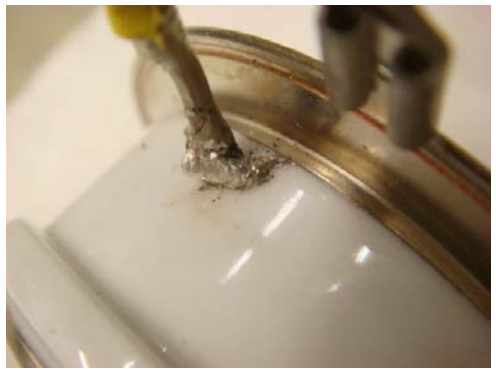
<i>Solder inspection - Gate pin</i> Inspect the cathode tag soldered joint. Ensure that the solder has fully wet the joint.	 A close-up photograph showing a soldered joint on a gate pin. The solder is a shiny, metallic grey color and appears to be fully wetting the joint. A red wire is visible in the background.
